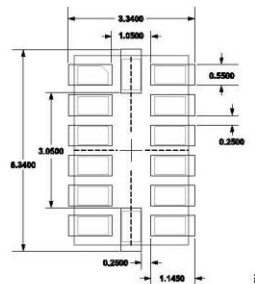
Recommended Printed Wiring Board Land Pattern (Dimensions shown in millimeters)
